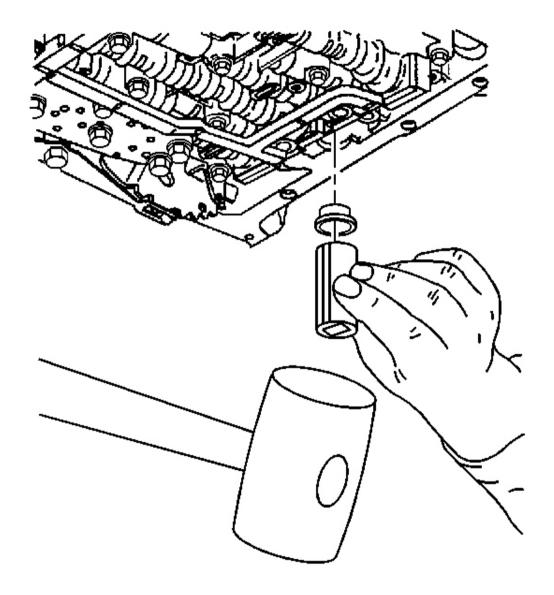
Installing The New Filter Seal Into The Transmission Case Courtesy of GENERAL MOTORS CORP.
